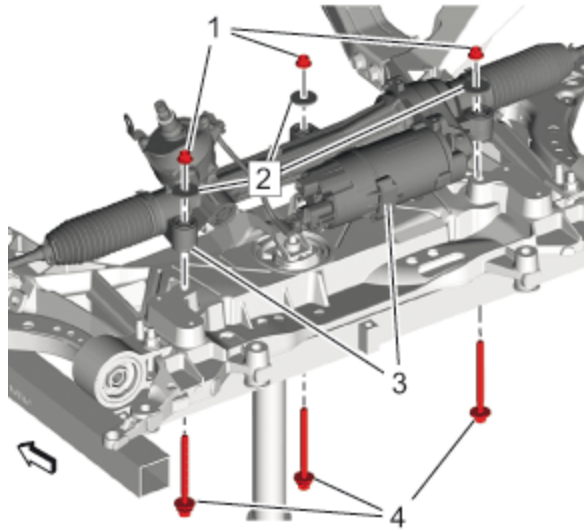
Electric Belt Drive Rack And Pinion Steering Gear, Bolts, Nuts And Washers
